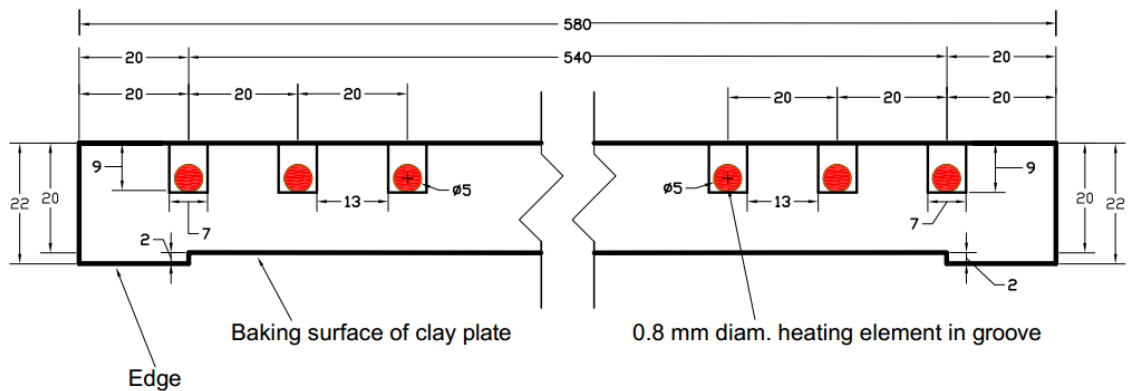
Section A-A view of clay plate of 58 cm diameter with heating element placed and sealed (NTS).
